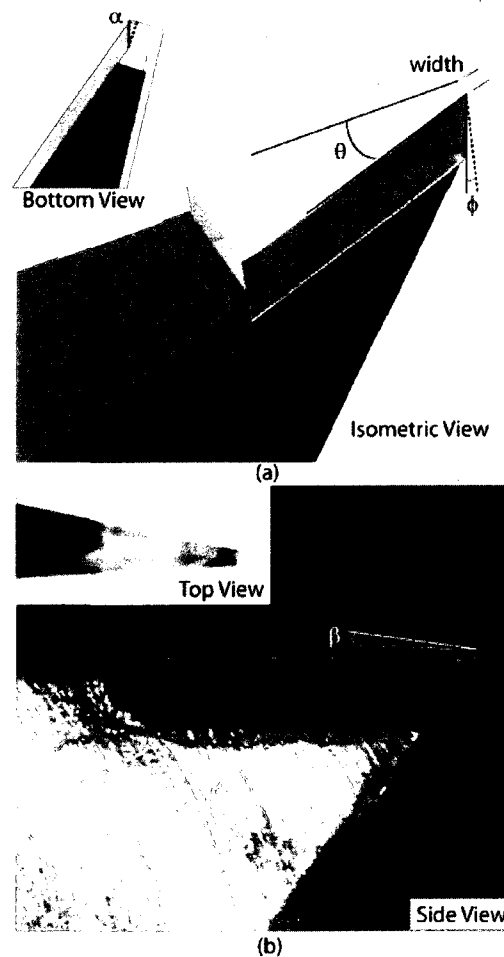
(a) Drawing of a flat bottom surface shaped tool for fabrication of the image mapper with some of its critical design parameters labeled. (b) Actual fabricated tool with a 75 micron wide flat bottom profile at tip of tool. The location of the rake angle,  $\beta$ , is also shown in this picture.
